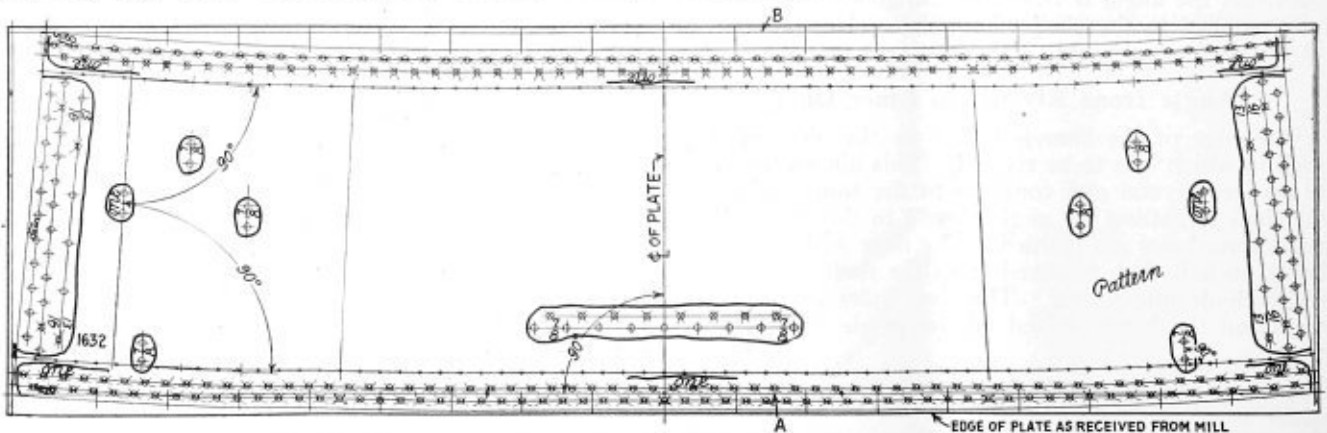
Cone course layout—horizontal bottom type. Pattern plate
